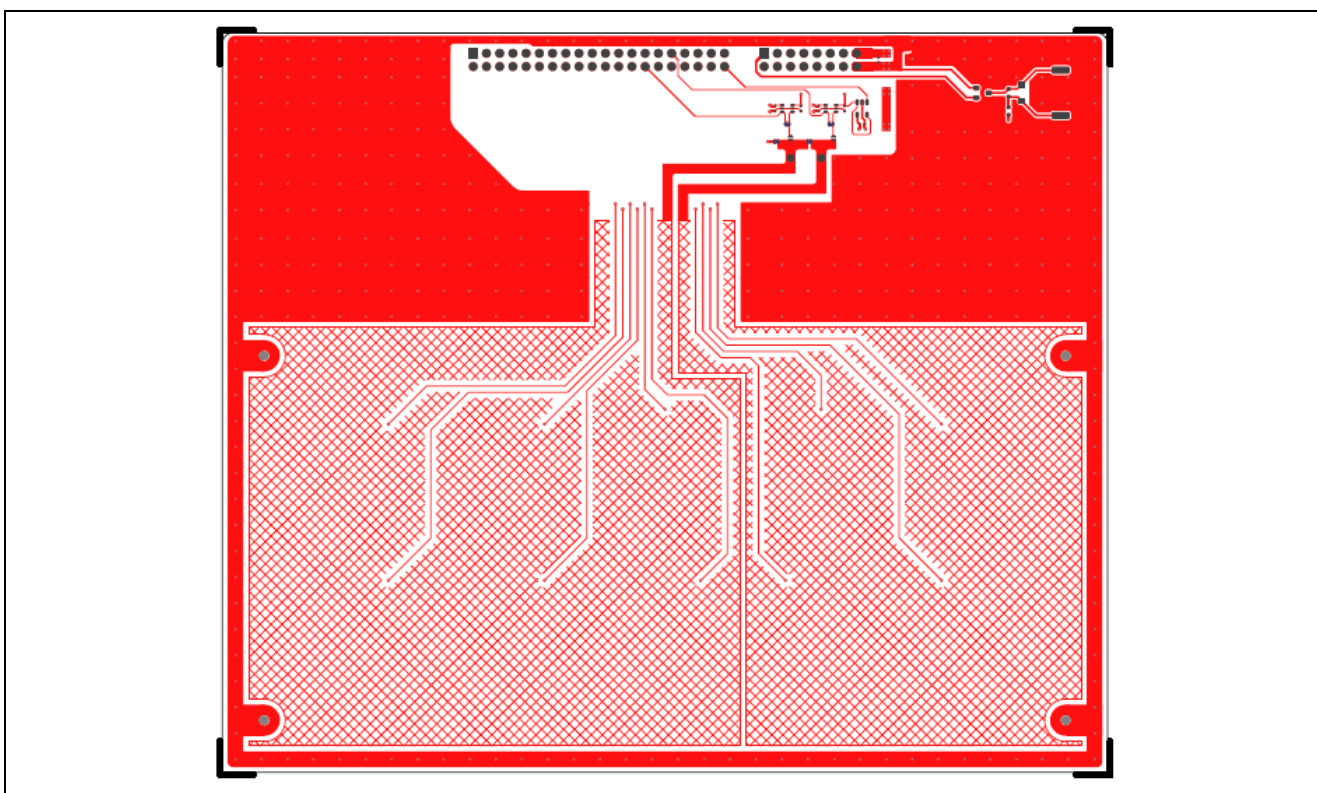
Solder-side pattern of touch electrode board (view of component surface)
